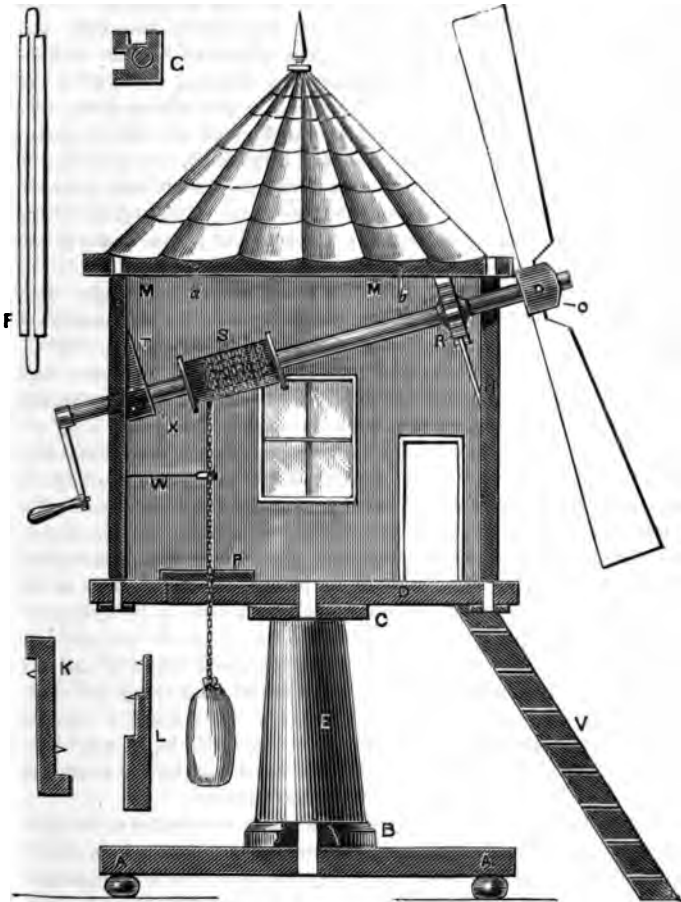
SIMPLE MILL WITH CLICK-CLACK ATTACHMENT.
